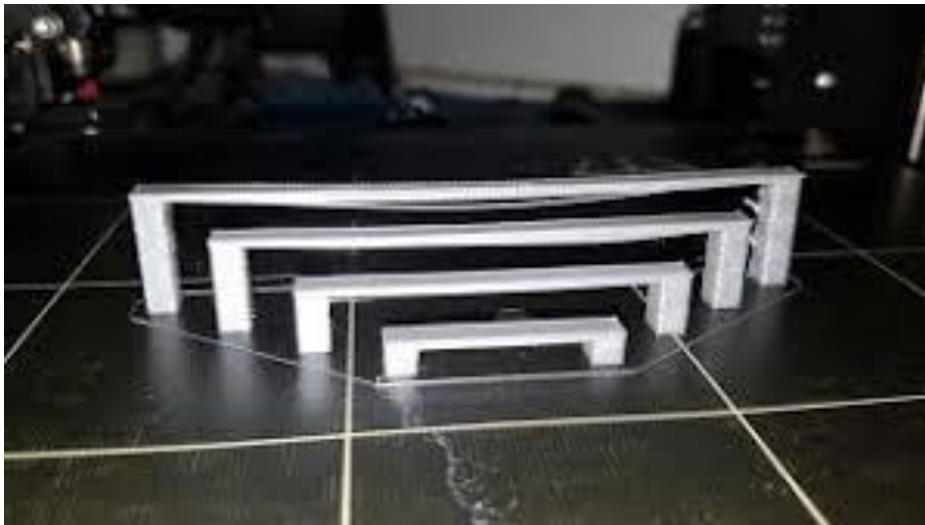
Short bridges are possible without additional supports. With longer bridges, filament will droop across the span of the bridge
